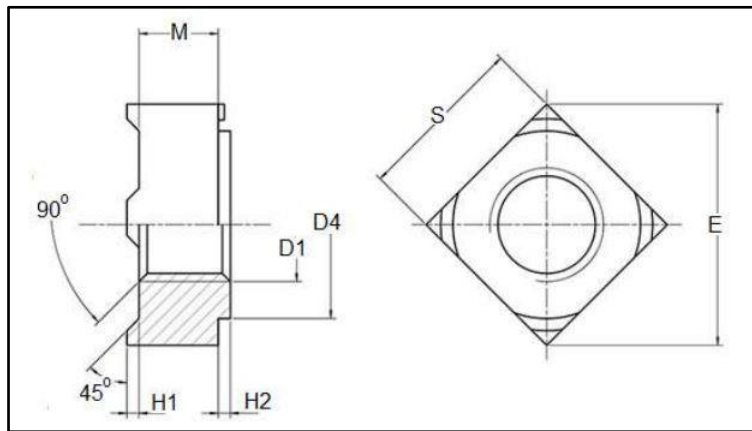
M4 DIN 928 weld nut (M4 DIN 928 kaynak somunu)
